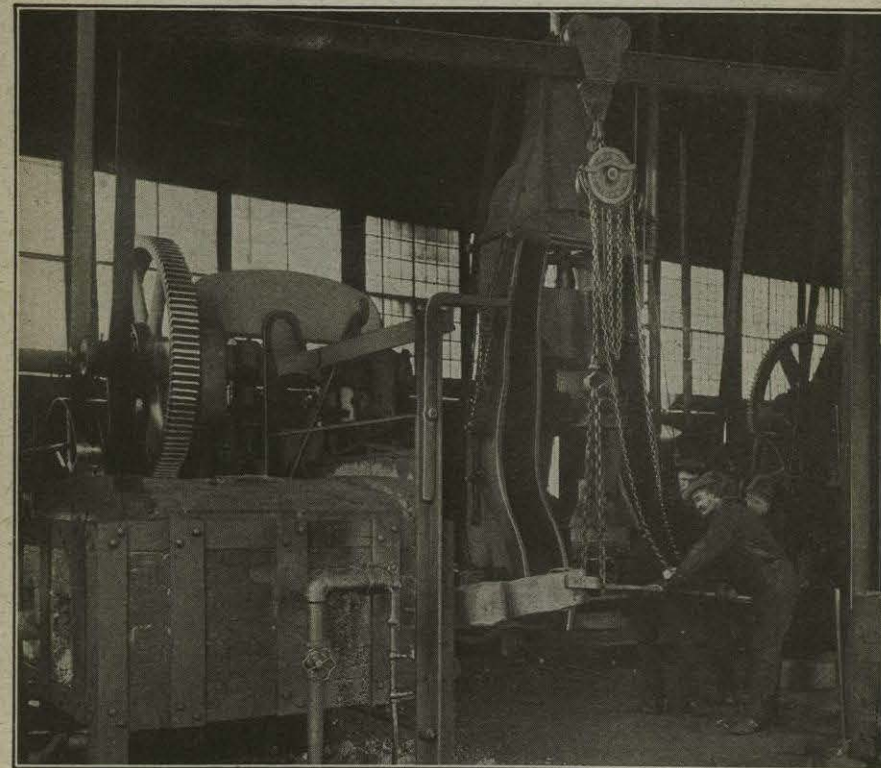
Taking crank-shaft from furnace to hammer for first operation.
